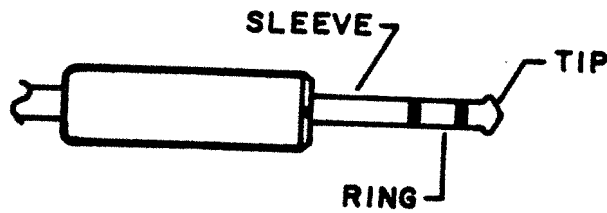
Tip-Ring-Sleeve Plug Outline Drawing.
